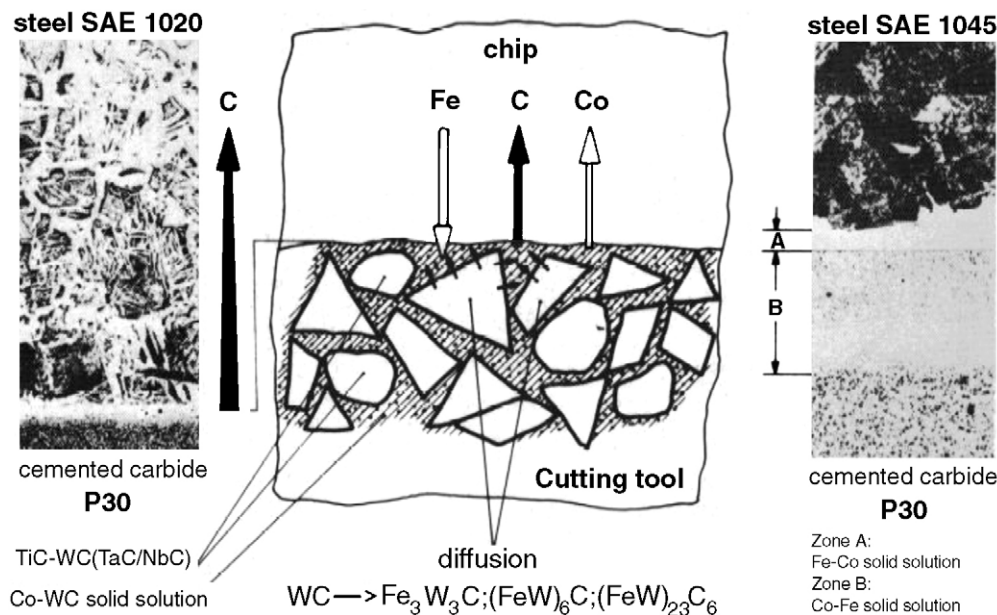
Material diffusion at the interface tool–workpiece (chip); after Tchätsch [1].
